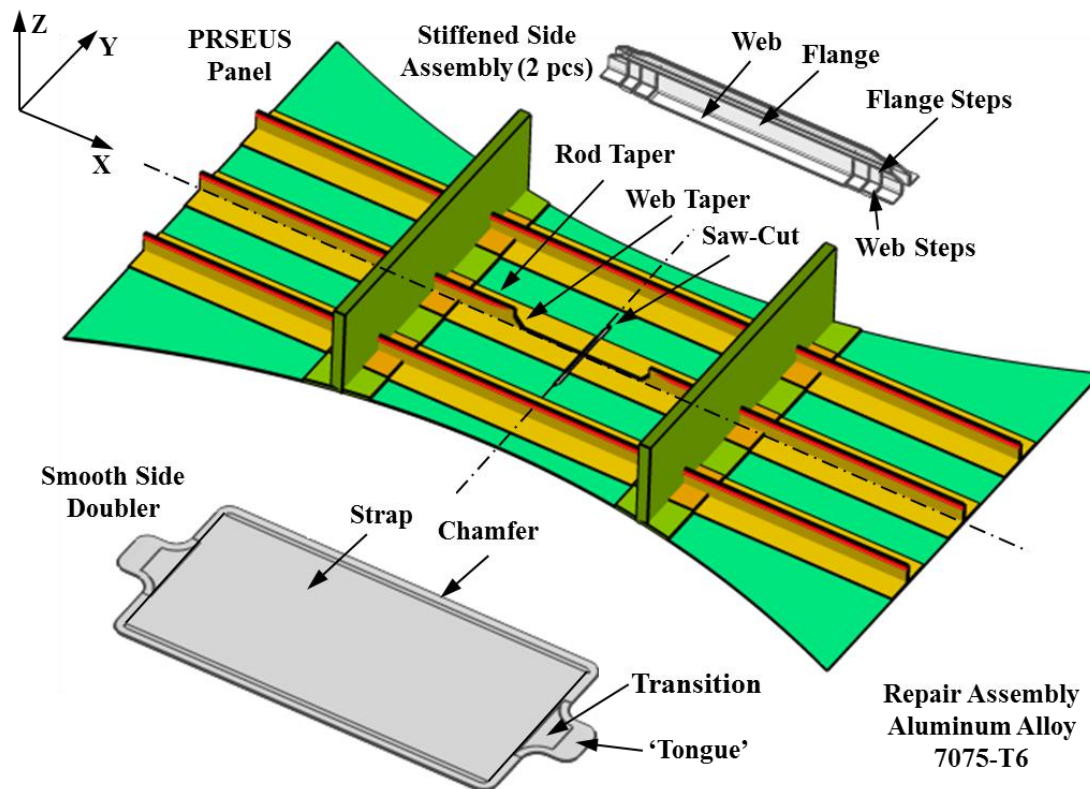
Exploded view of the bolted metallic assembly and the tension repair panel.
